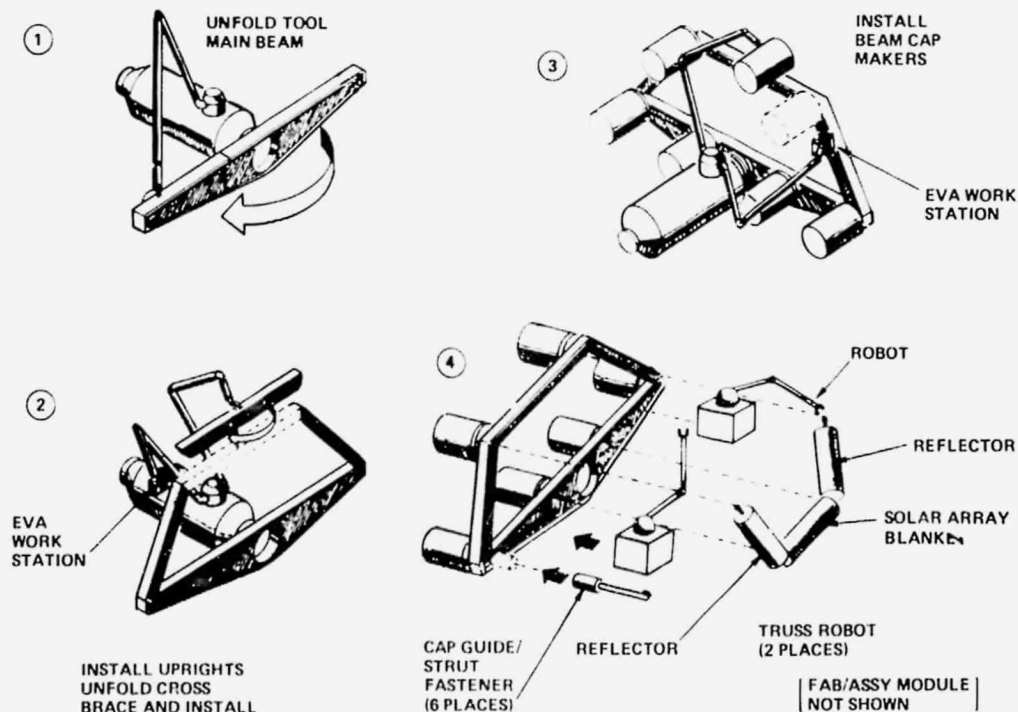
Test Article-2 Solar Collector Fabrication and Assembly
